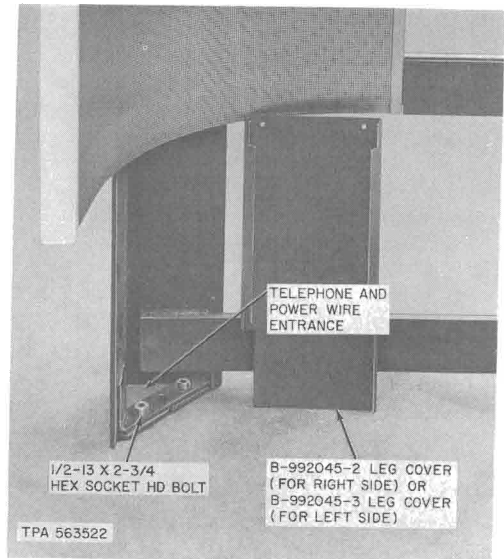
List 14 Leg Assembly Bolted to Mounting Surface
